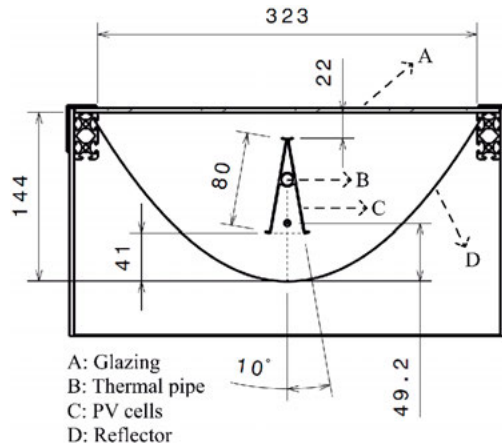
Cross-section (with dimensions in millimeters and degrees) view of the parabolic trough solar collector with a wedge PVT receiver.
